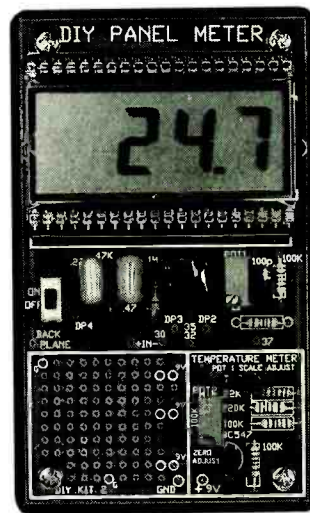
THE TEMPERATURE-SENSING transistor can be located on the PC board, but leads must be attached for calibration.
